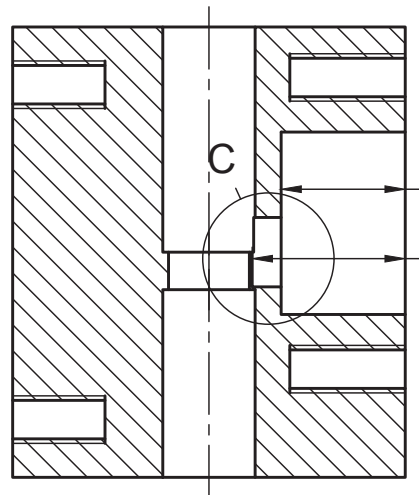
Cross-section of the sensor block showing the coupling slot opening into a section of the waveguide.
